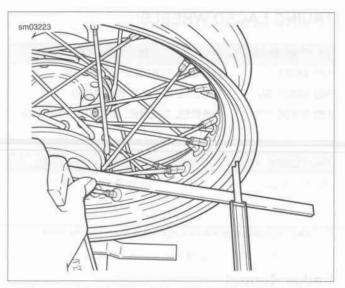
Checking Wheel Hub Offset Dimension (typical)
